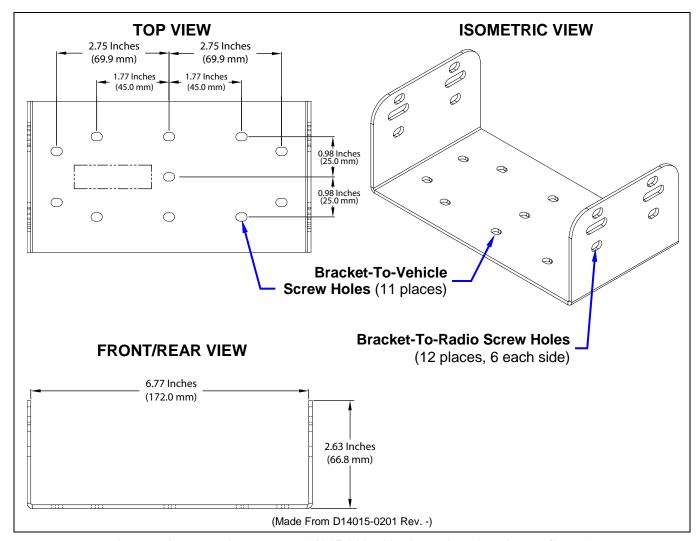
Mounting Bracket 14015-0201-02 Dimensions (Radio Not Shown)
